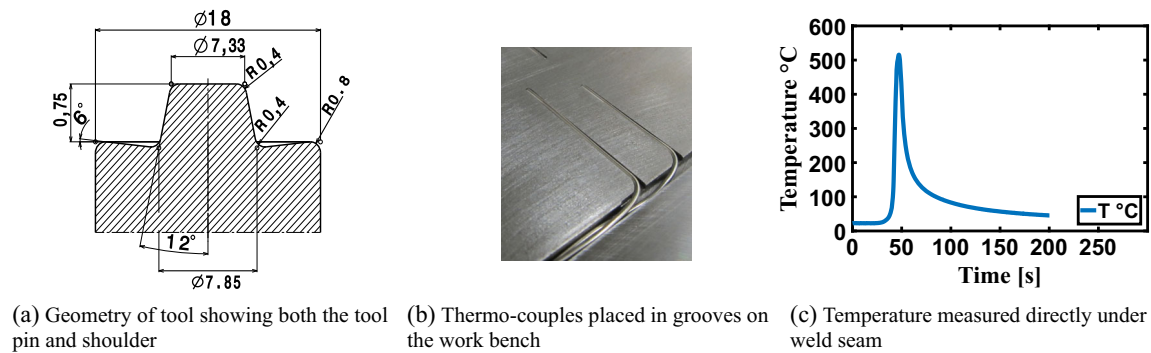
Tool geometry; embedded thermo-couples; temperature profile measured by the embedded thermocouple underneath the weld seam
